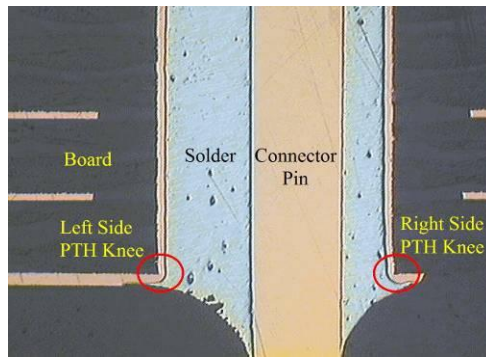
Cross-section of a Single PTH with a Soldered Connector Pin
